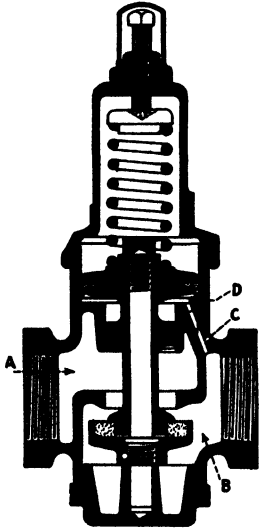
Piston operates this pressure-reducing valve. (Courtesy of Foster Engineering Co.)
